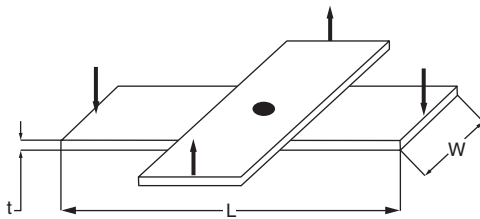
Specimen and mounting fixture for a cross-tension test. Source: Ref 14
